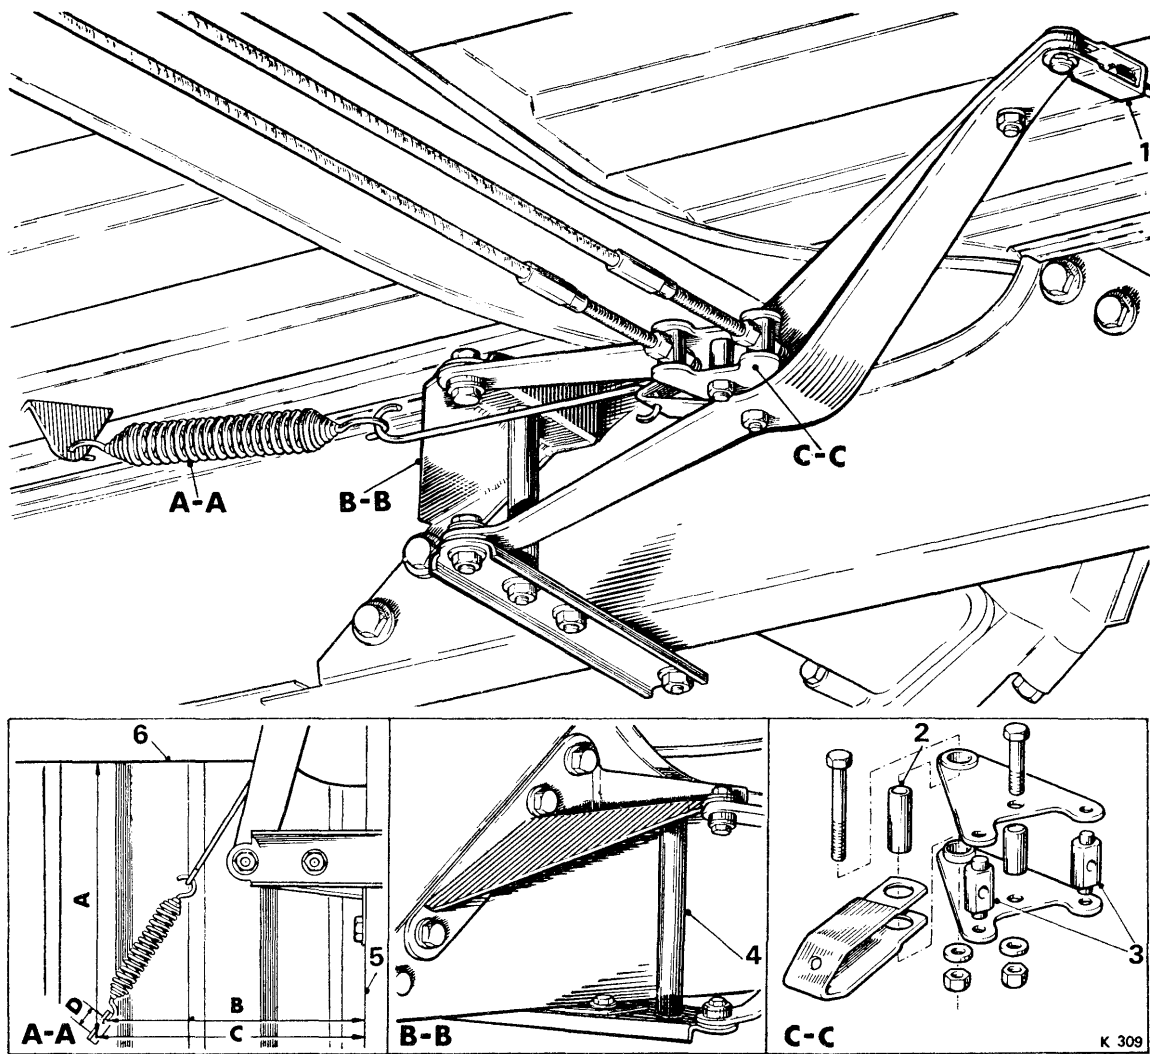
HAND BRAKE CABLE CONVERSION (EARLY CARS)
